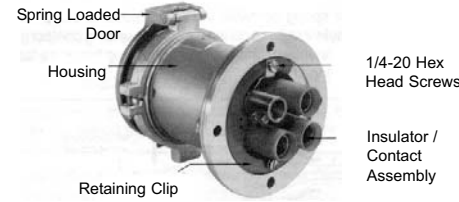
Insulator / Contact Assembly (Style 2 Shown)
